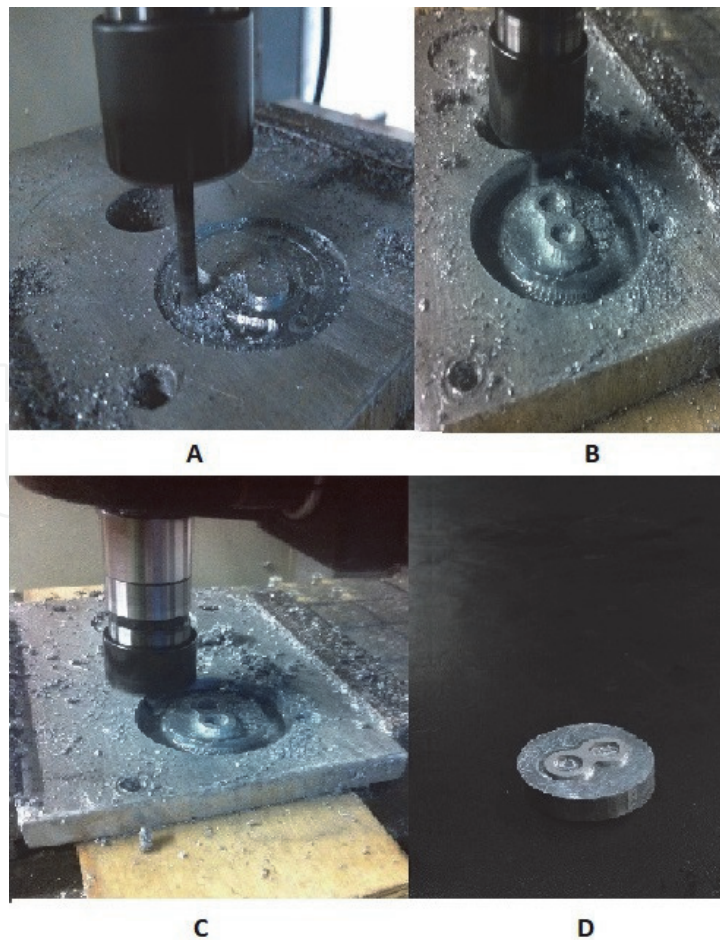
Alphanumeric part machining process (A) initial machined part. (B) Intermediate part machining (C) intermediate machining of the part figure (C) intermediate machining of the part contour (D) final machining of the part.
